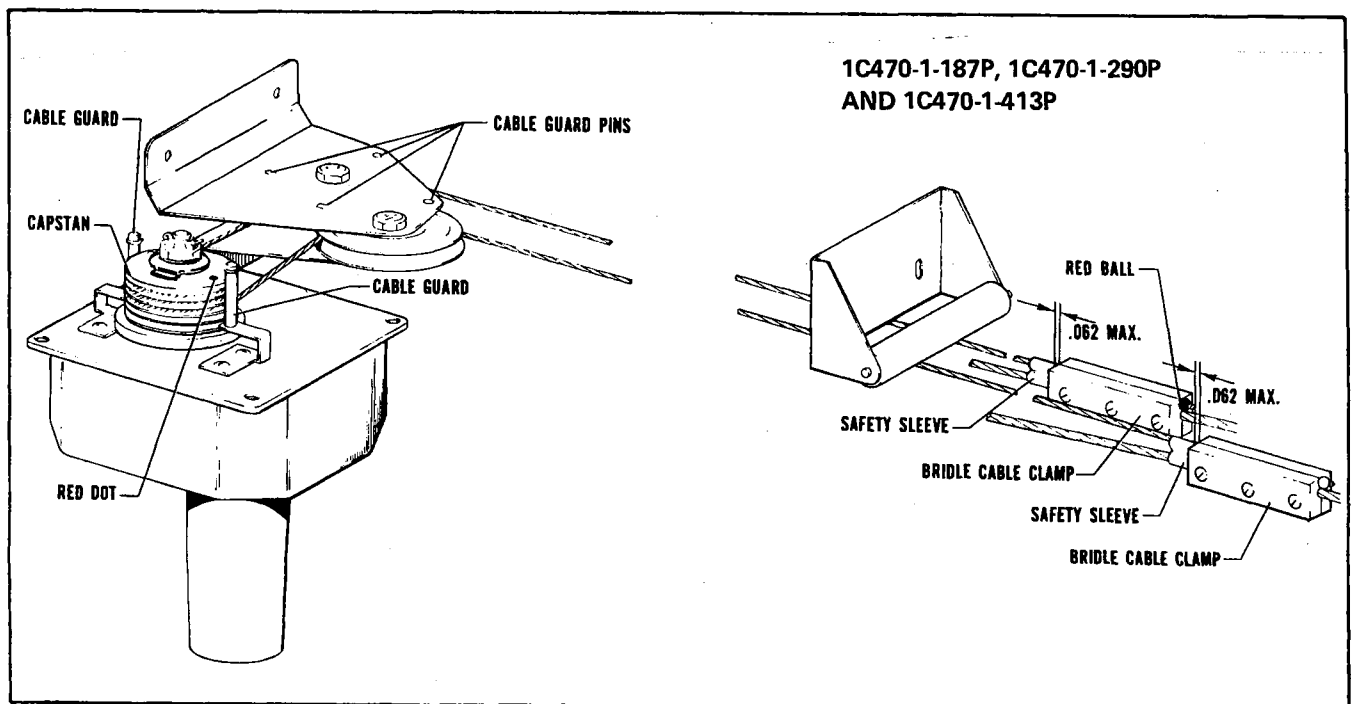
Pitch Servo Installation, PA-31, PA-31-350 and PA-31P
